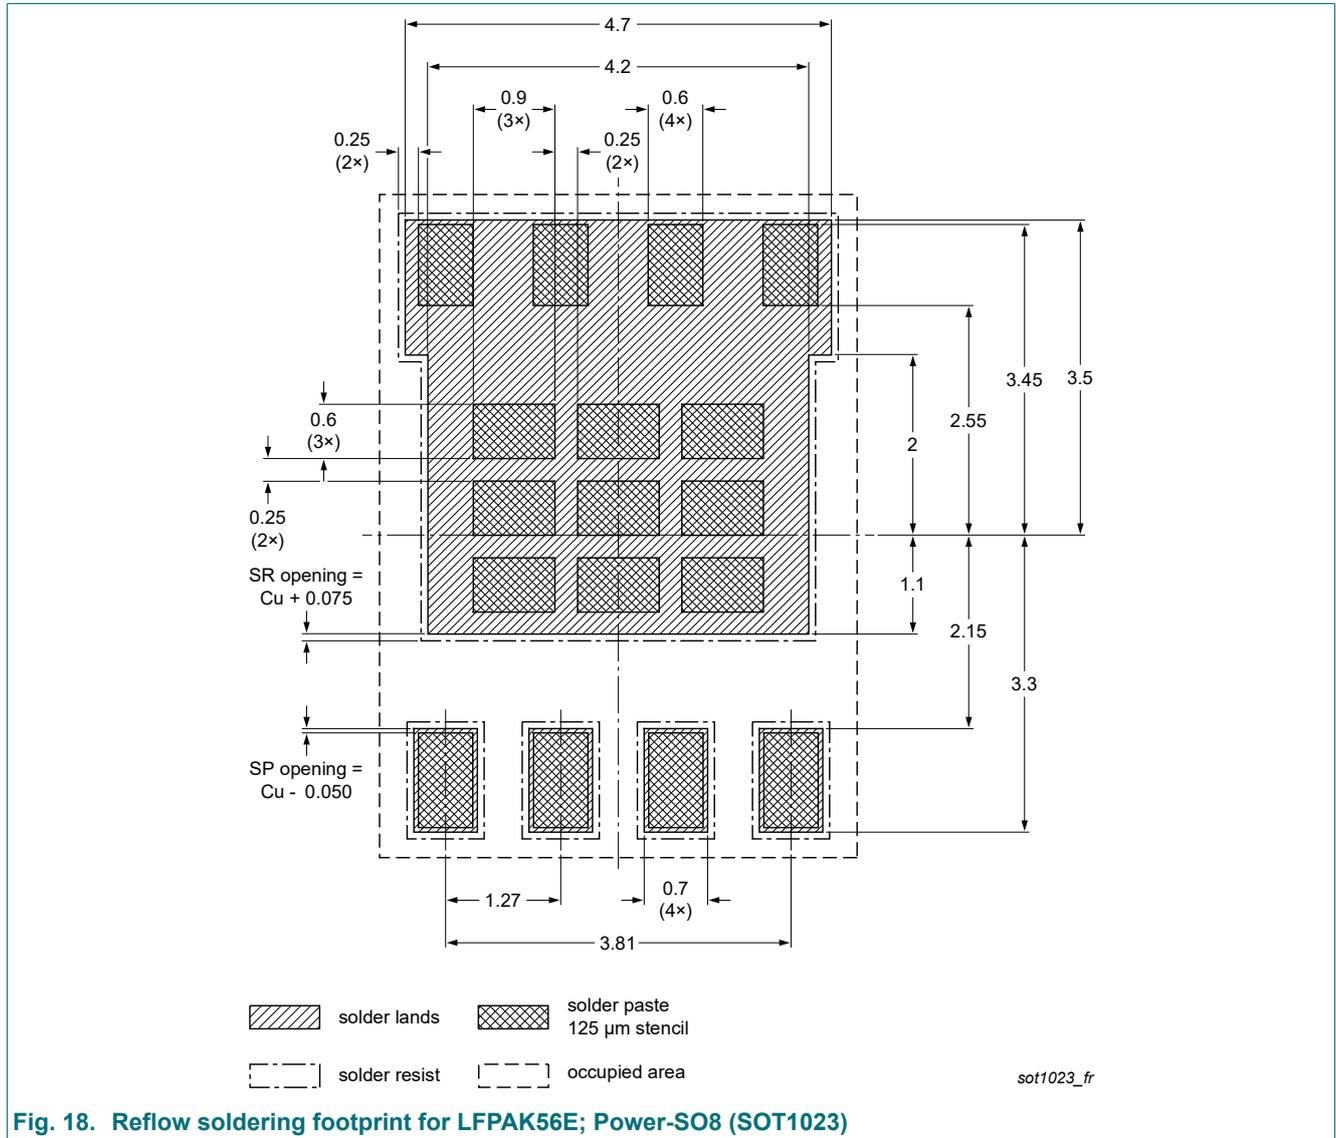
Reflow soldering footprint for LPAK56E; Power-SO8 (SOT1023)
